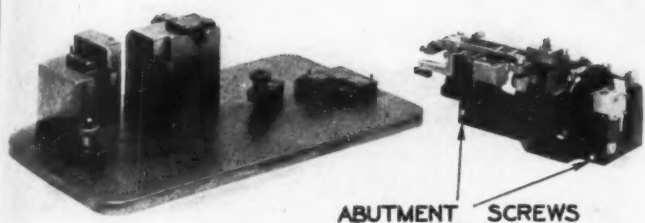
Cam unit, right, with the functional gage by which its mating surfaces are checked
